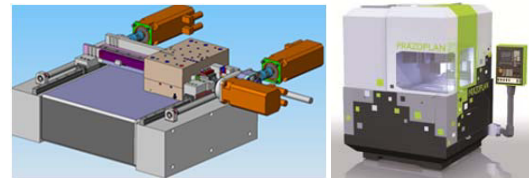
Präzoplan, planar guided milling machine left: design principle, right: machine prototype built at IWF [25].
